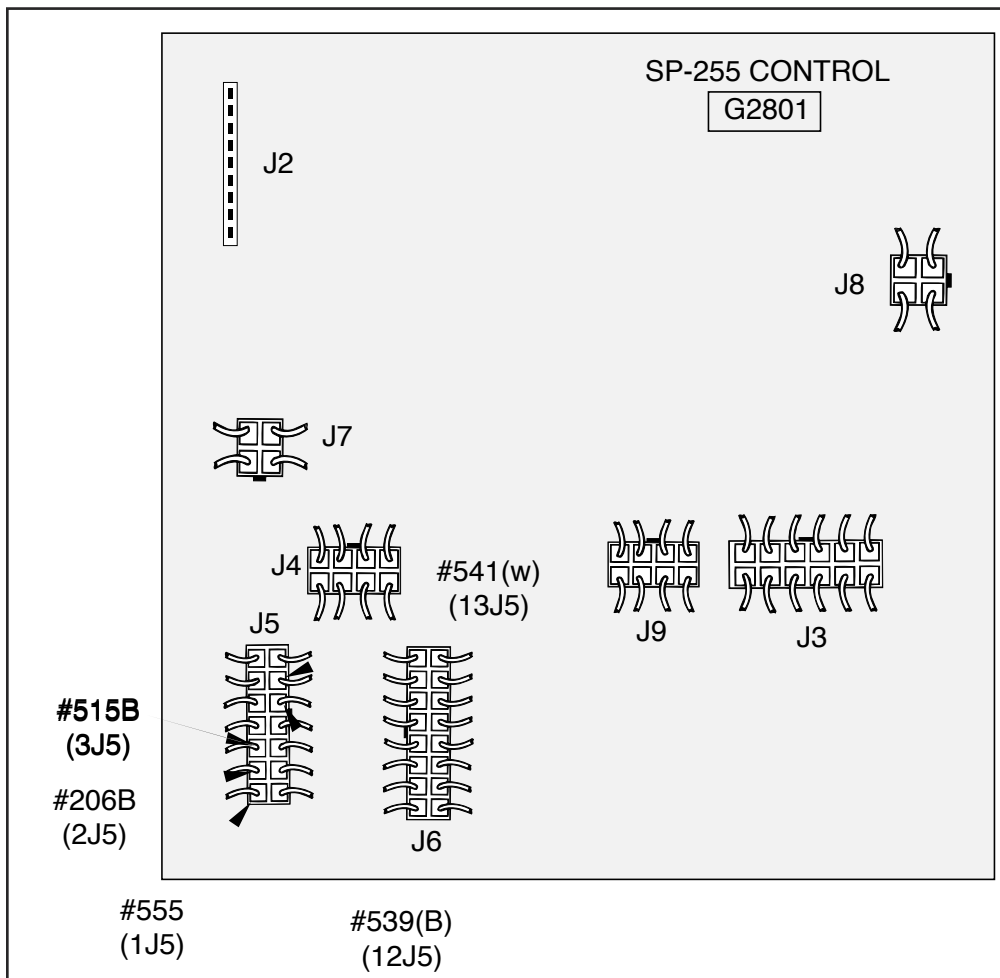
Plug J5 Location on G2801 PC Control Board.
